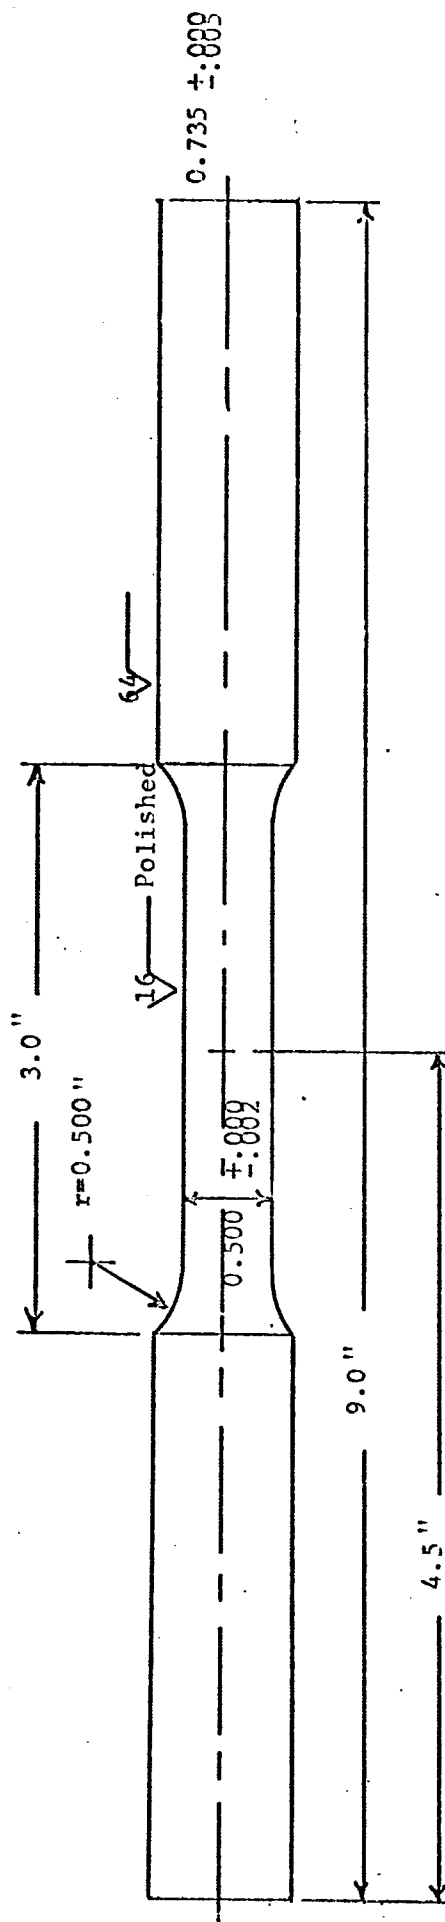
Ungrooved Tensile Test Specimen of 4340 SAE Steel.
